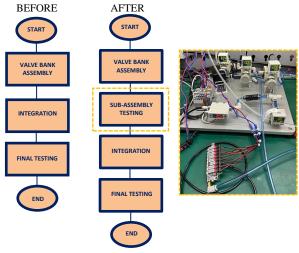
Valve Bank Assembly Testing was added on the existing process flow.
